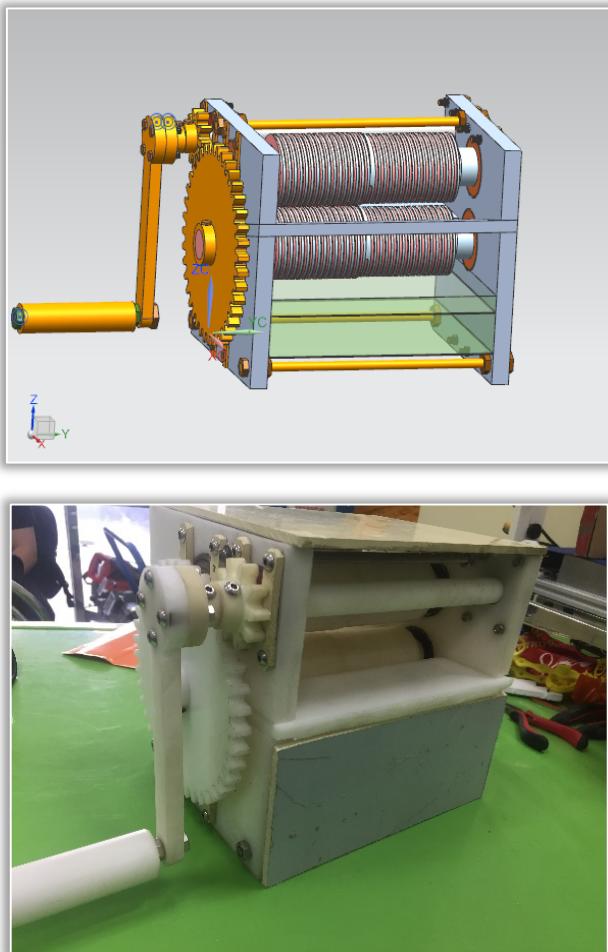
Assembled Prototype of the Mini Sugarcane Press
